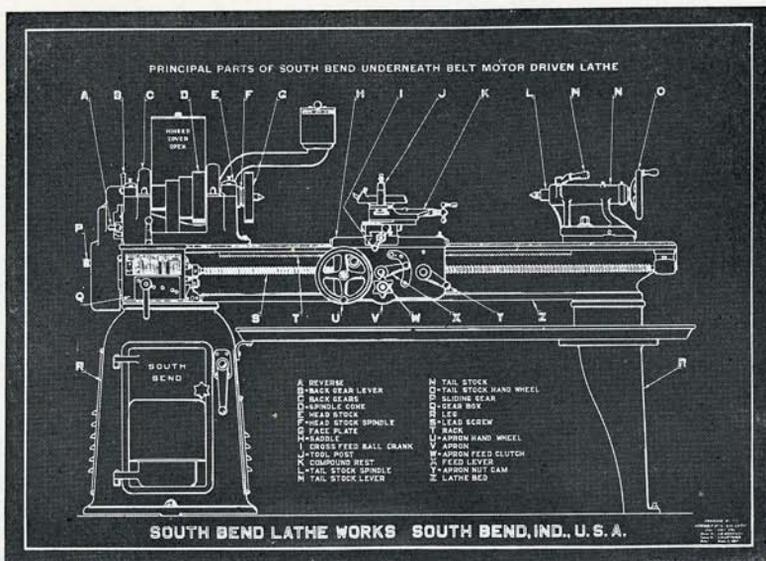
Blueprint No. 175 "Principal Parts of a Lathe."
